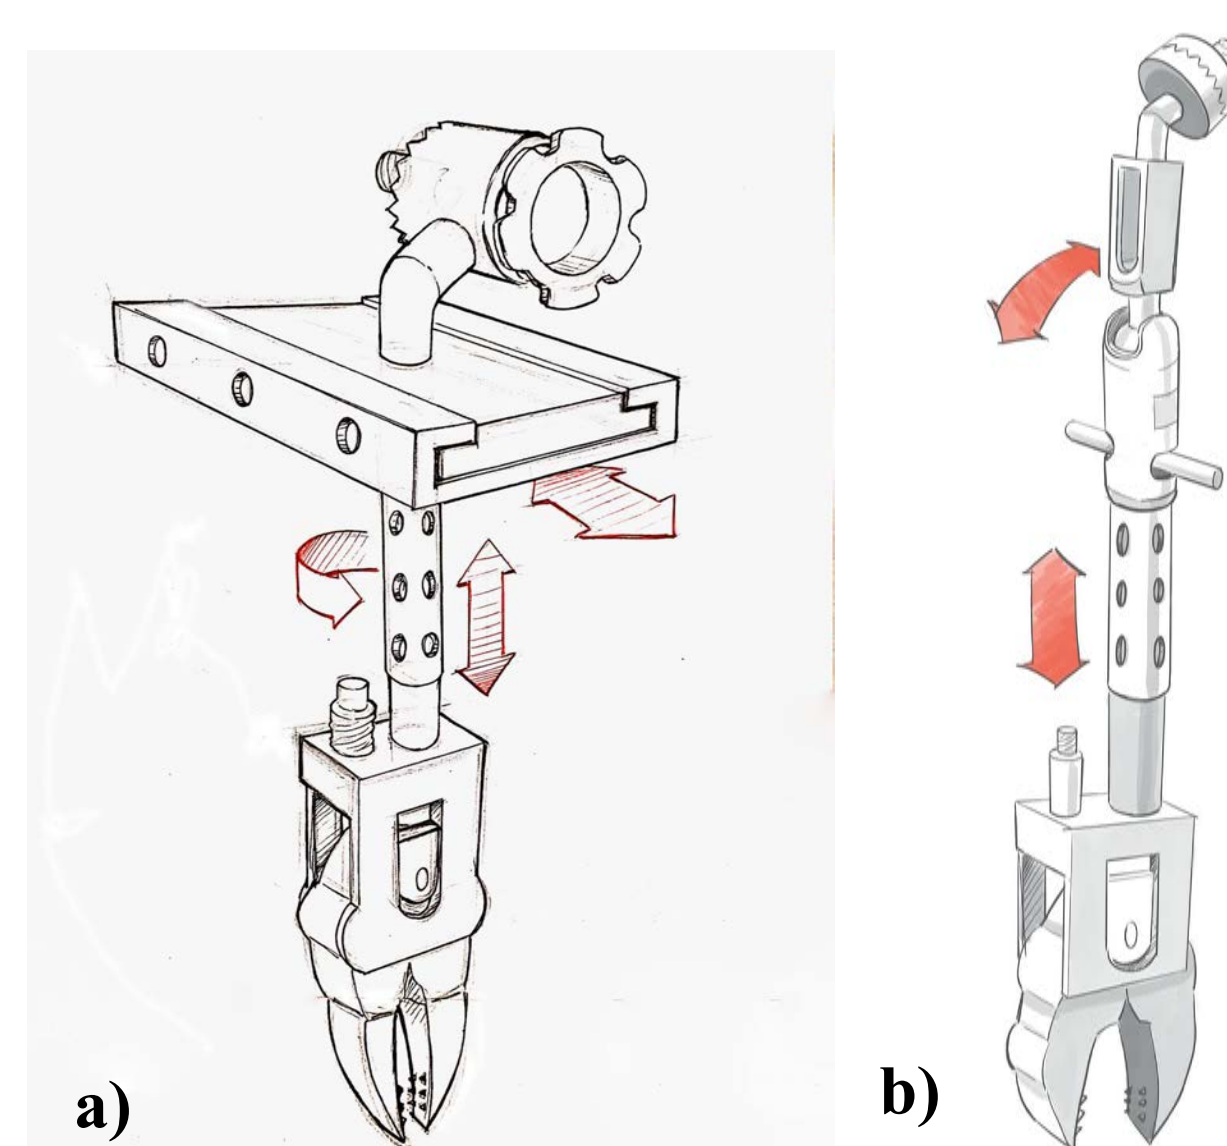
Early on sketches of the a) rail and b) ball and socket designs
